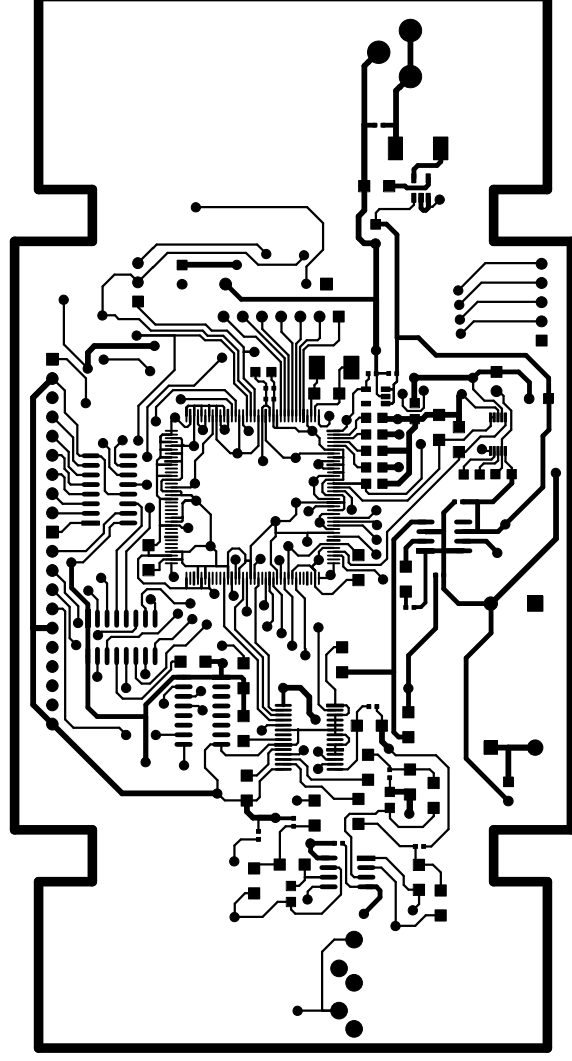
PCB Layout Bottom Copper (1:1 scale)
